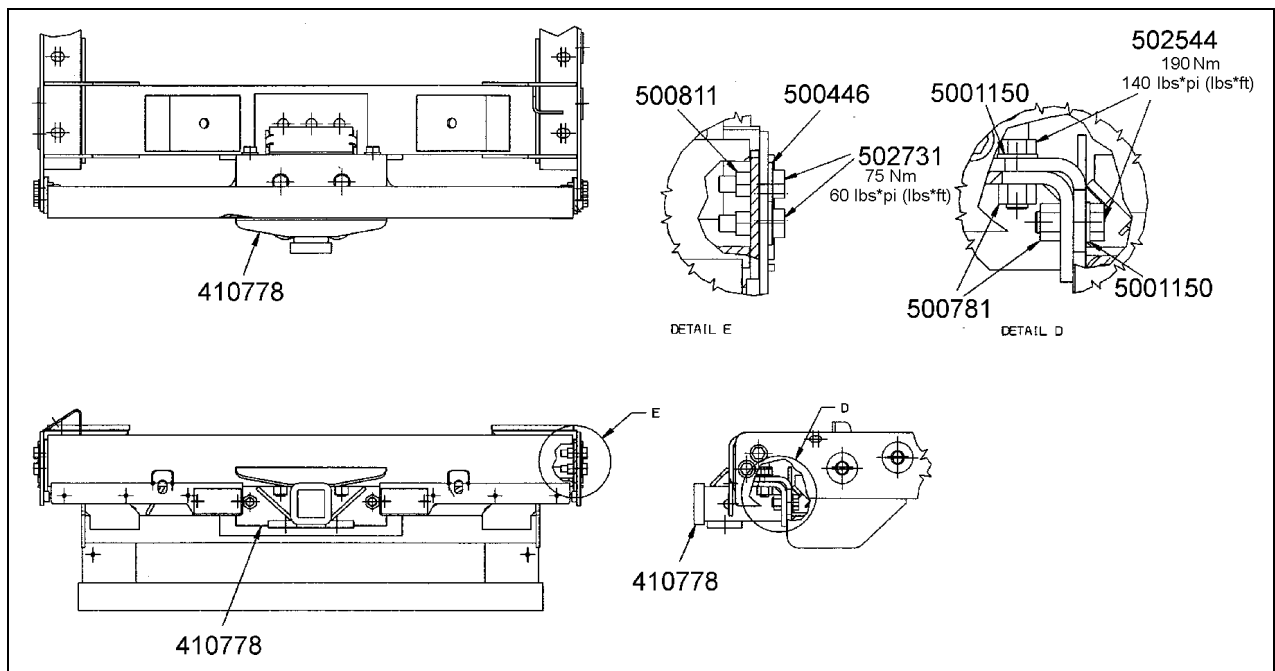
TRAILER COUPLING DEVICE INSTALLATION
